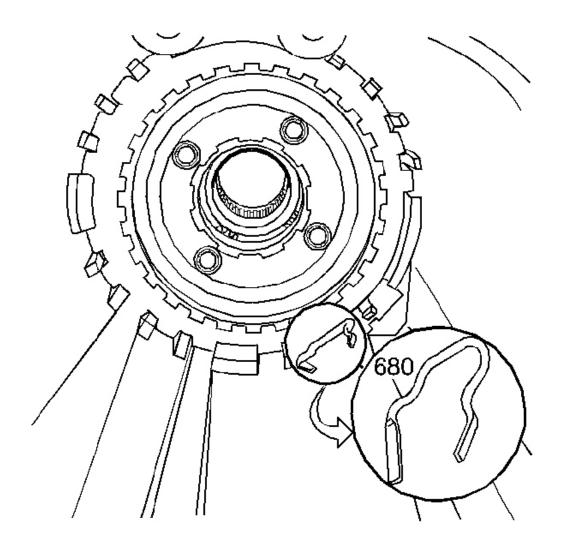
Locating Output Shaft Courtesy of GENERAL MOTORS CORP.
